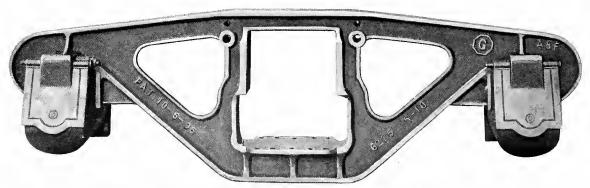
Andrews Cast Steel Freight Car Truck Side Frame for Use without Tie Bars. American Steel Foundries.
